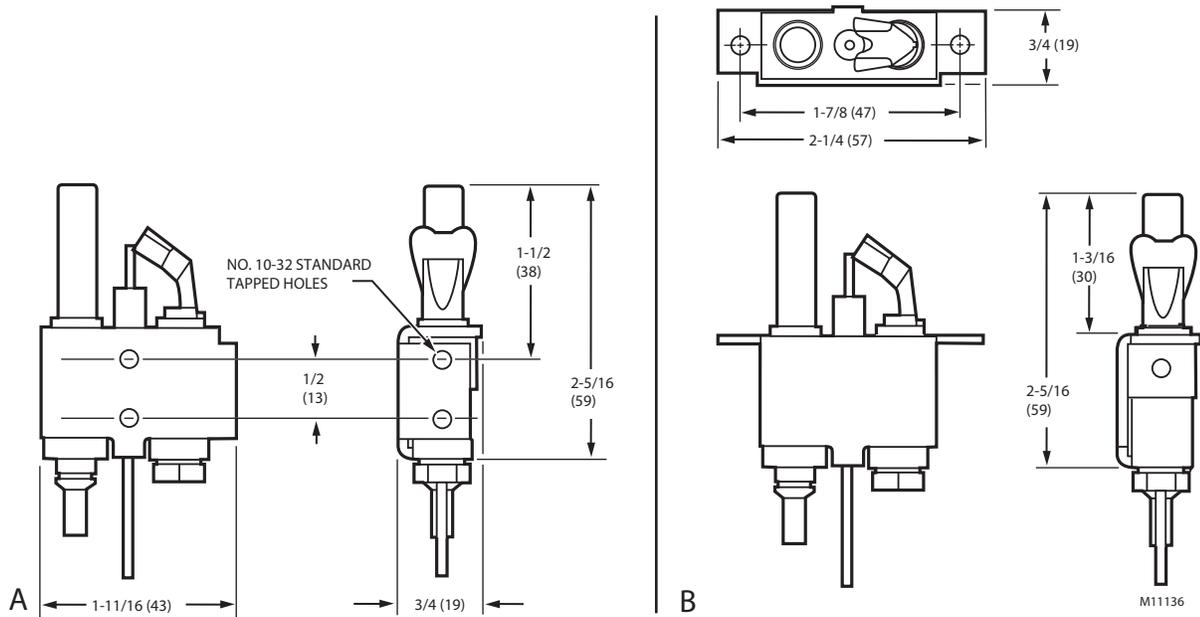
Q379 mounting brackets and dimensions in in. (mm)
